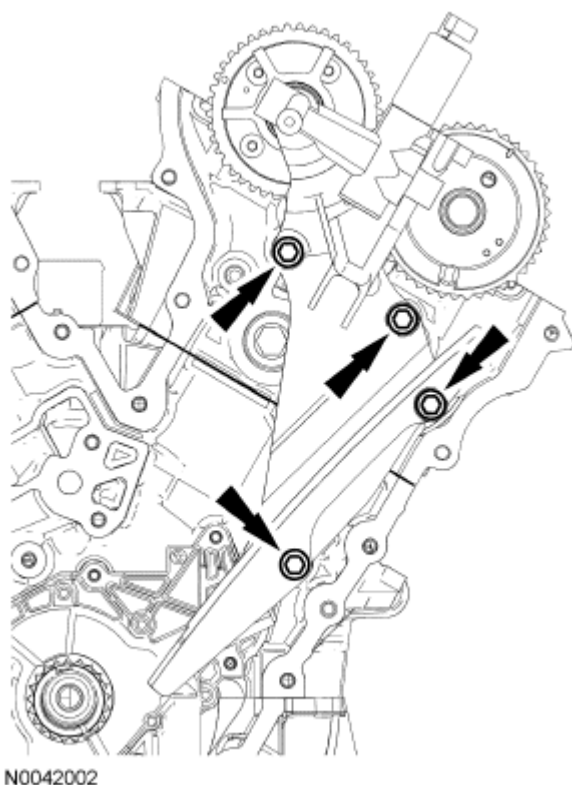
Locating Variable Camshaft Timing (VCT) Assembly And Bolts
